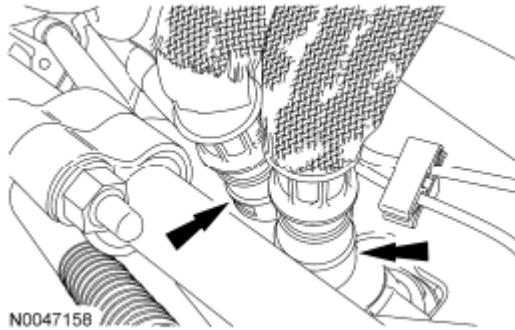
Locating Auxiliary Heat Coolant Hoses
